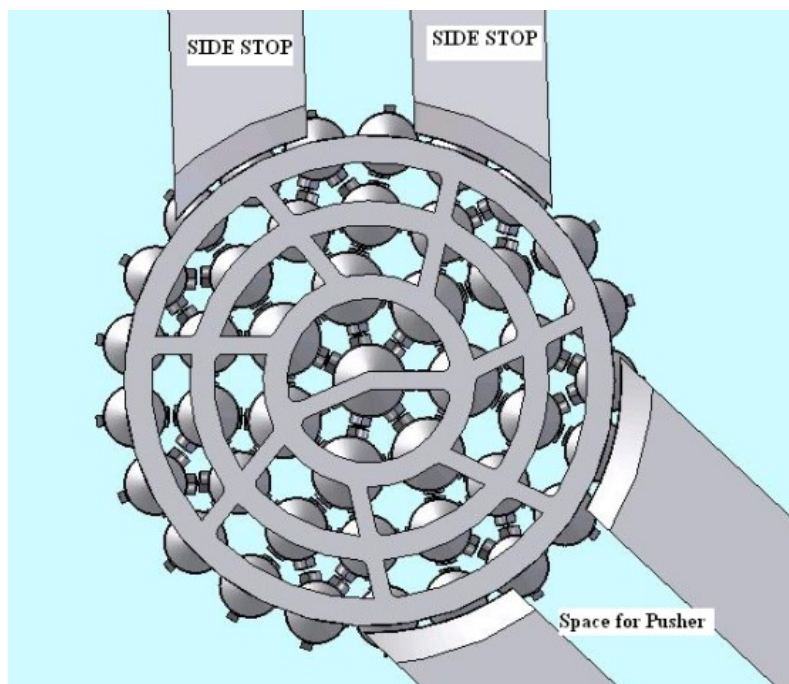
Interface between T43 fuel bundle and CANDU-6 Fueling Machine Components.
